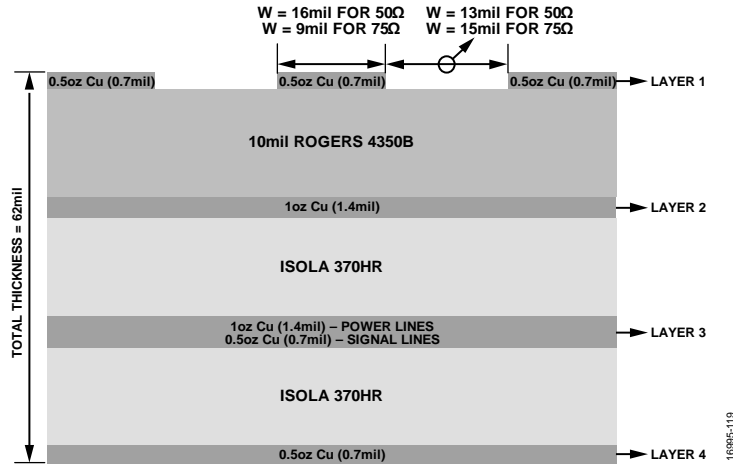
ADMV4420-EVALZ PCB, Cross Sectional View
